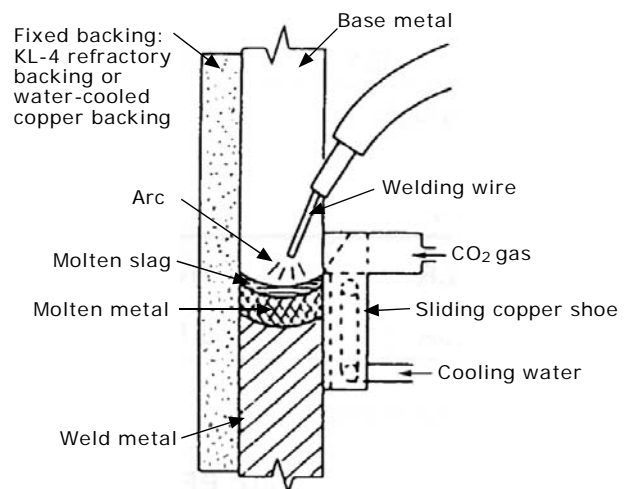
The SEGARC process for one-run vertical butt welding
